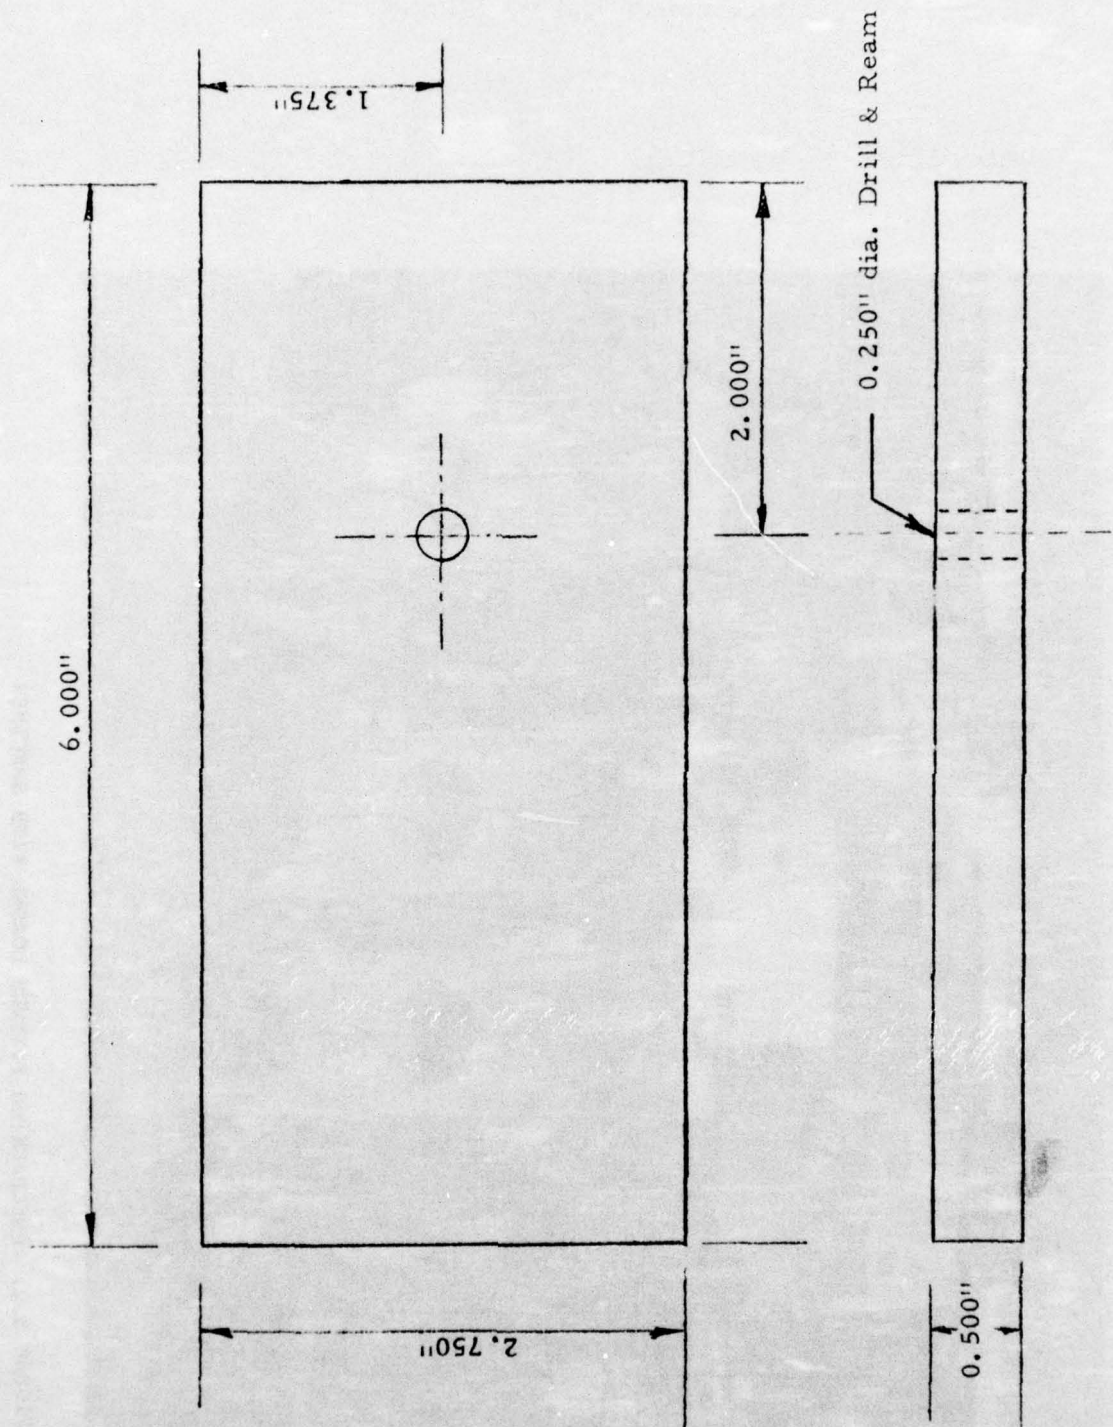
FATIGUE CRACK SPECIMEN CONFIGURATION
